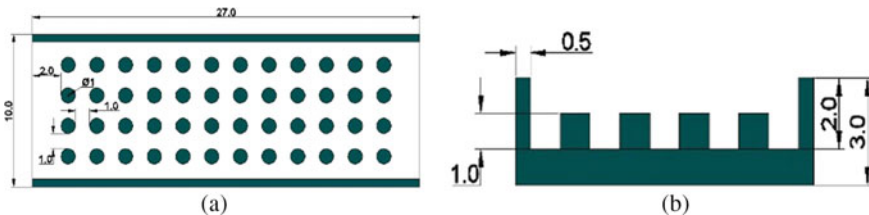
Detailed 2D sketch of circular pin fin a top view b side view
